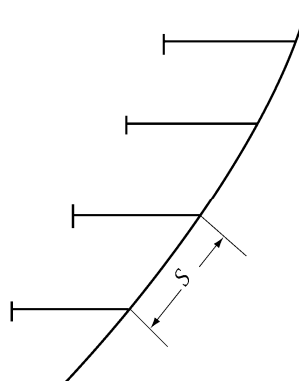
Measurements and shell plating stiffened in a spacing S
